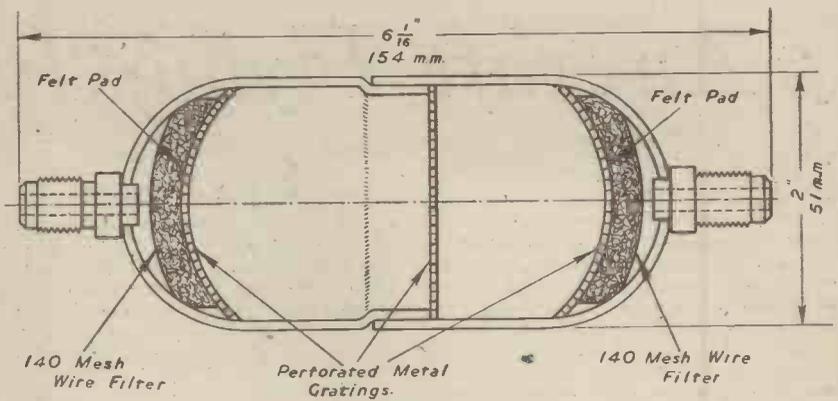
Sectional view of a drier. (By courtesy of British Thermostat, Ltd.)
